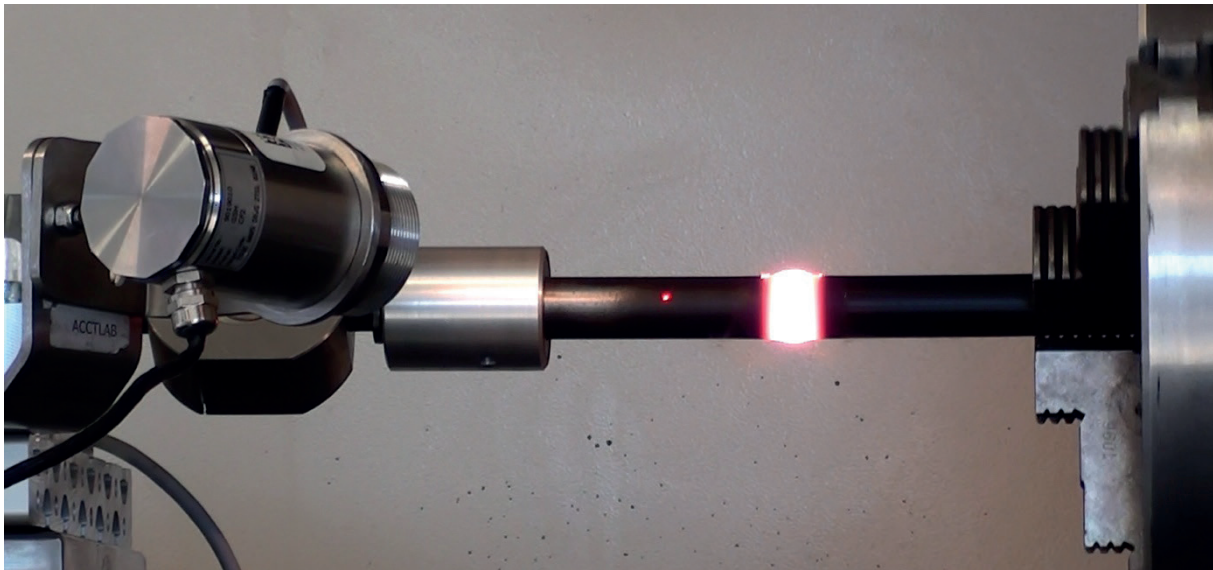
The execution and measurement stand concept: 1 - pipe quickly rotating around its axis, 2 - laser head (pipe heating), 3 - pyrometer, 4 - force sensor, 5 - axial thrust actuator, 6 - swivel handle
